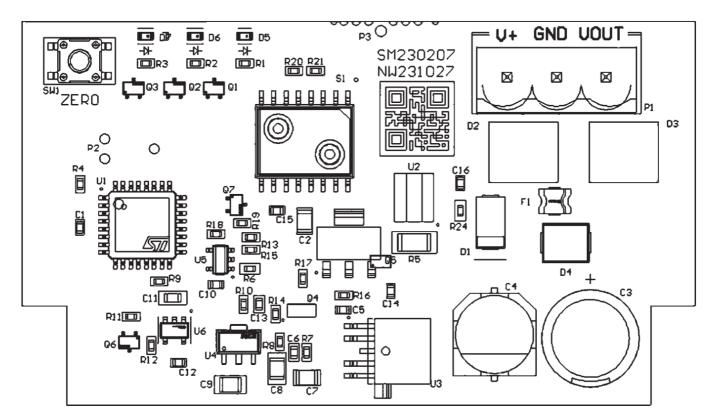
Circuit Board (Wiring plug removed for clarity)
